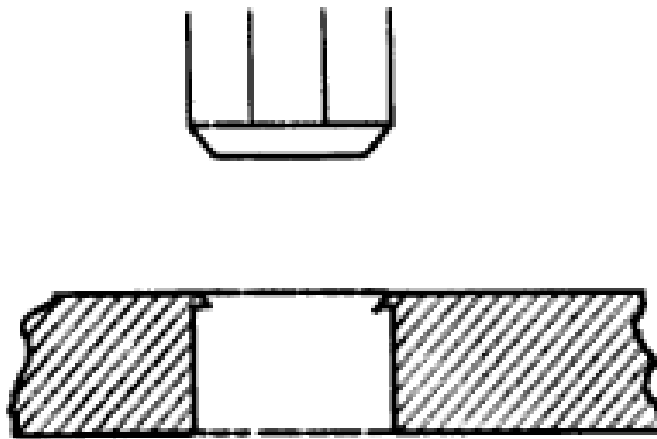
Reamer Removes Burrs Rolled Over Into a Hole
